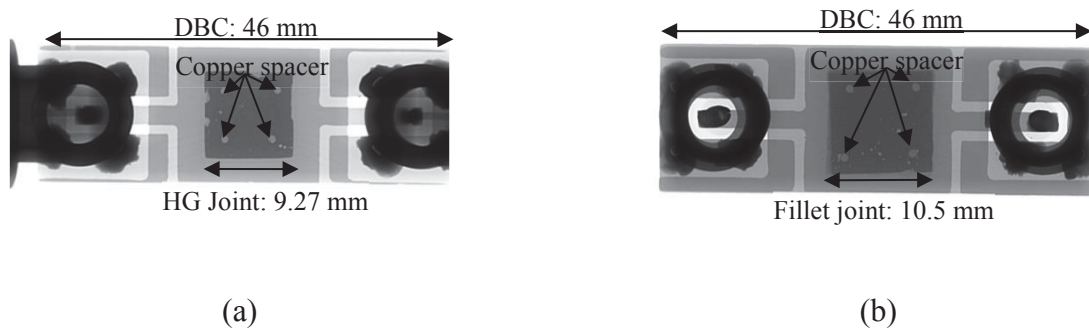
X-ray image of fabricated samples of HG joint (a) and fillet joint (b) with the package in Figure 3-13.
